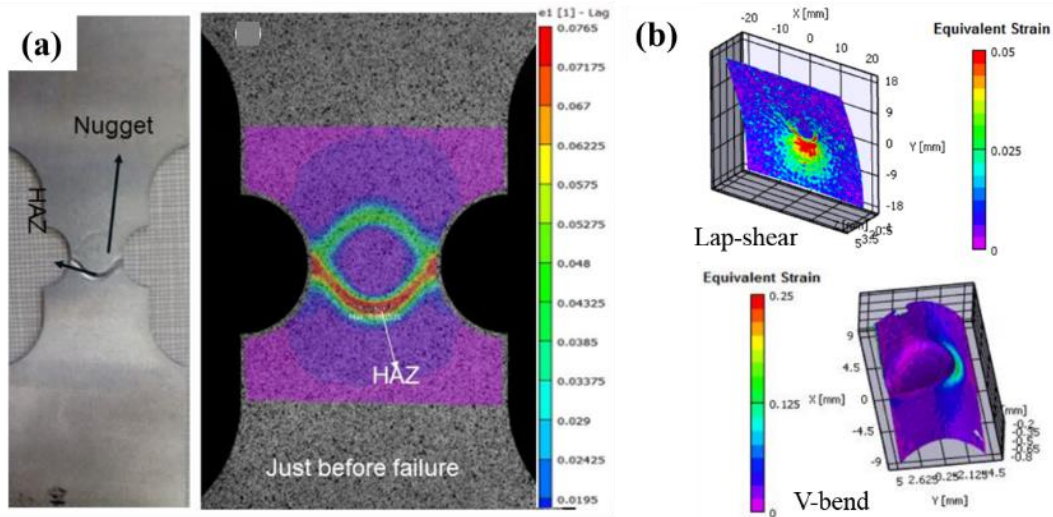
Strain field measurement on the surface of spot welded samples using DIC technique (a) notched tensile sample in Usibor®1500 steel [78], (b) 3D DIC results used for lap-shear and V-bend tests in Usibor®1500 steel [79].
